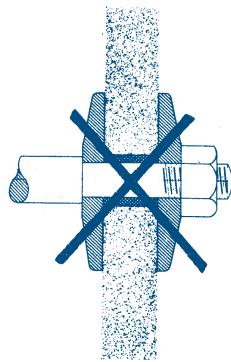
An incorrectly mounted wheel flanges not recessed and washers not fitted.
